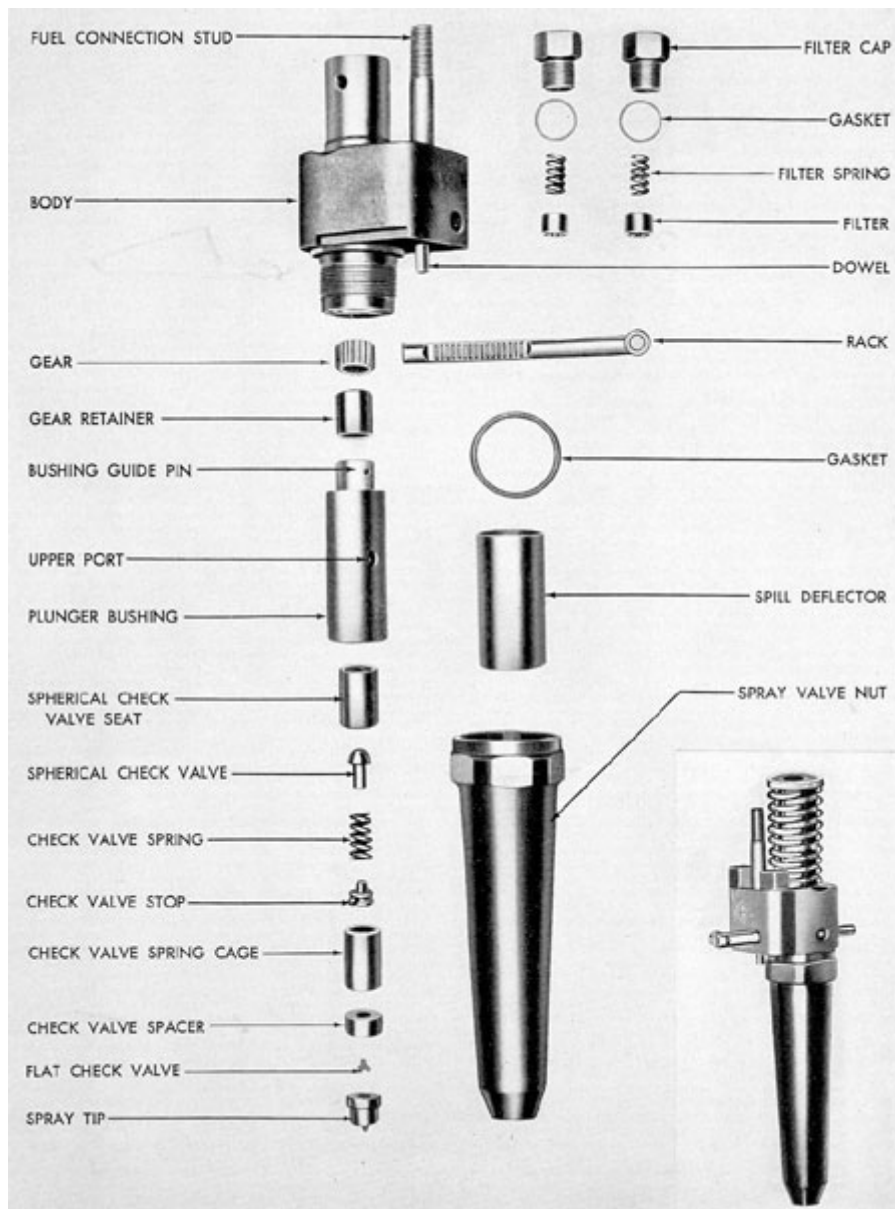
Relative arrangement of parts, spherical check valve type unit injector, GM.
